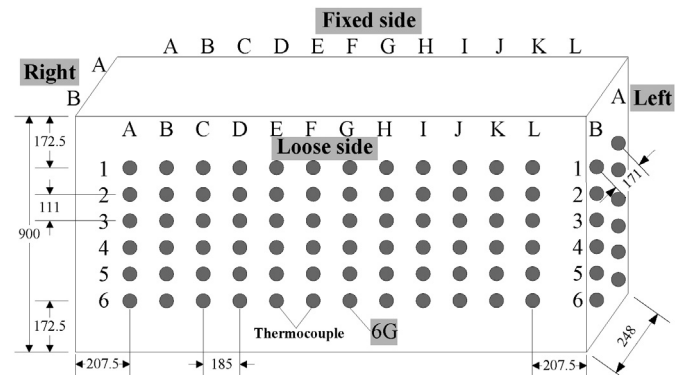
Arrangement of thermocouples embedded in mold copper plates [mm].
